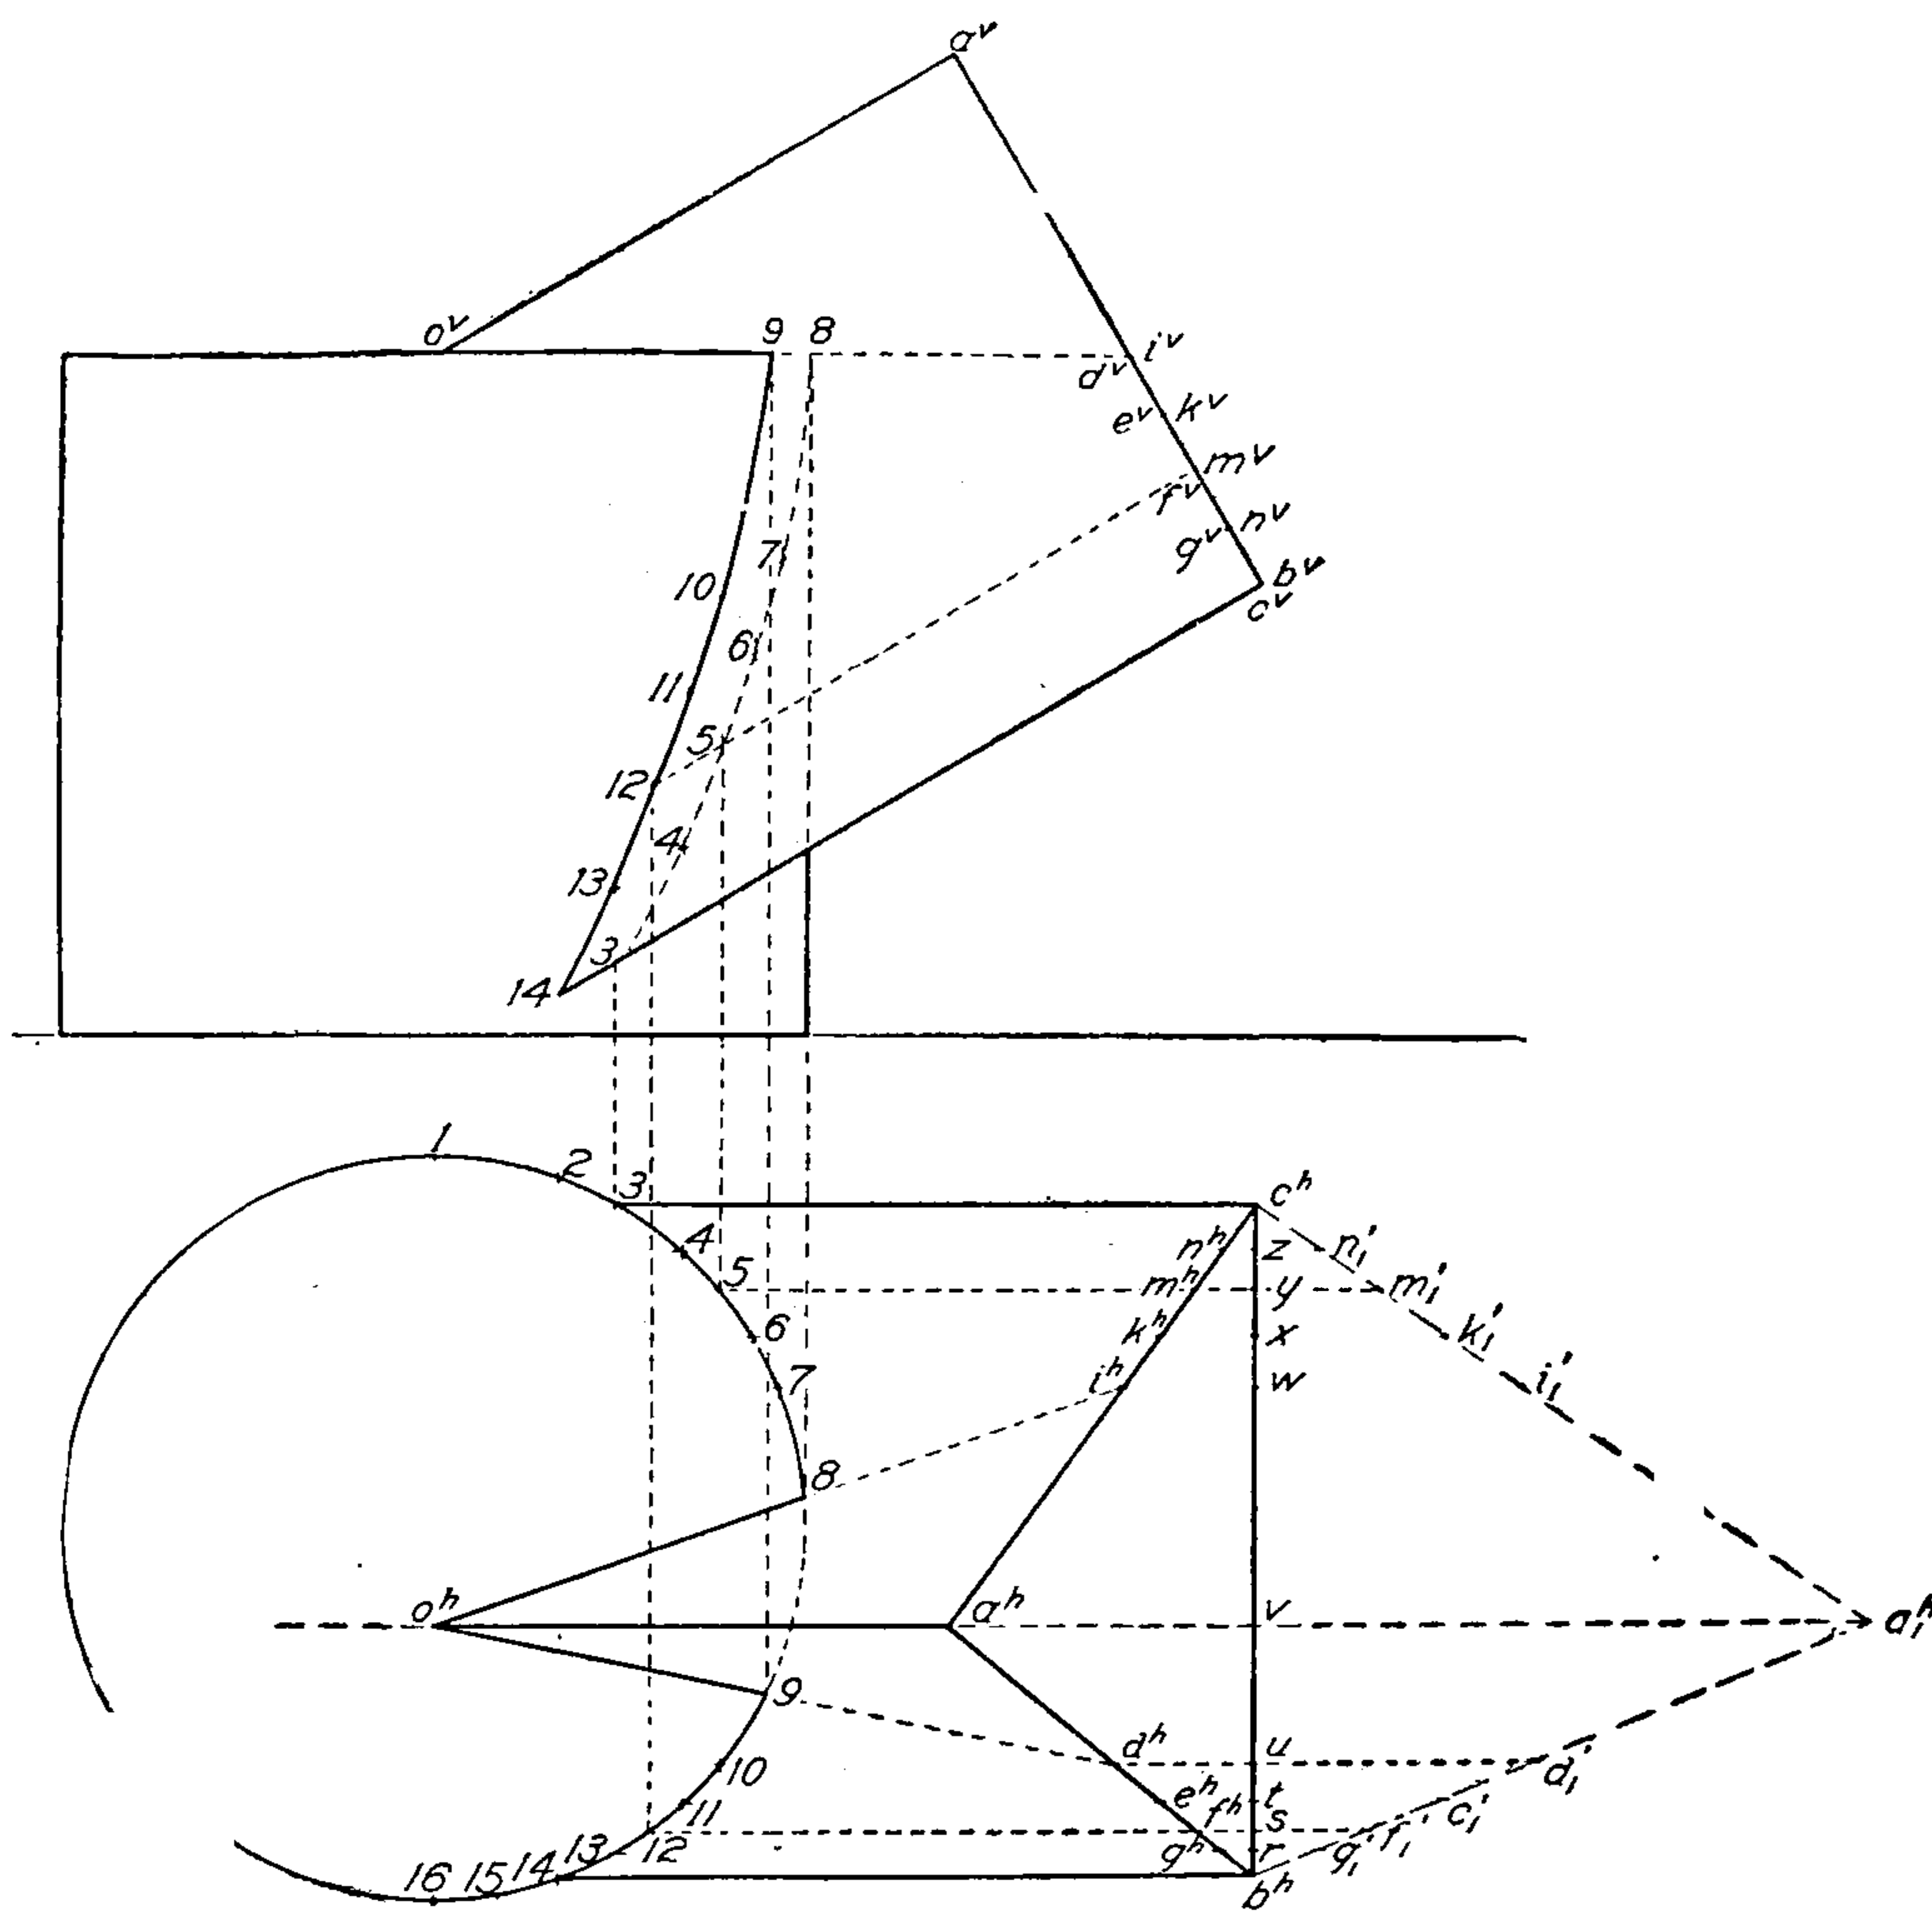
Plan and Elevation of Intersection of Cylinder and Triangular Prism
